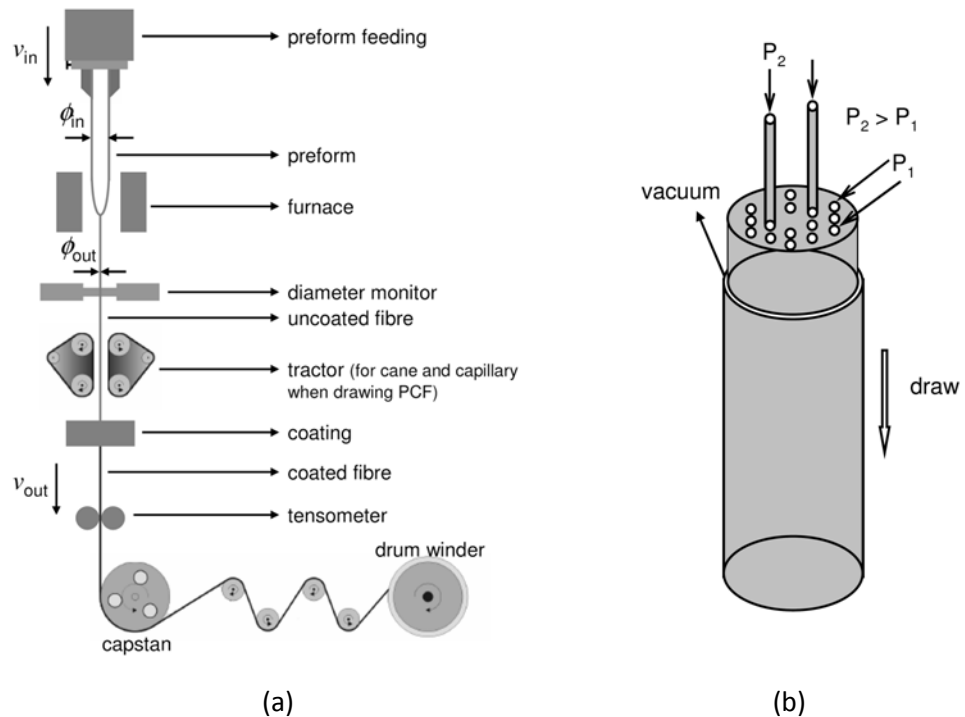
(a) Schematic diagram of a fibre draw tower showing a preform being fed into the furnace at the top and fibre drawn out at high speed from below; (b) Technique to manufacture birefringent PCF. Differential pressure is applied to the holes around the core of the preform compared to the rest of the cladding as it is drawn to fibre. (Images from [63]).
